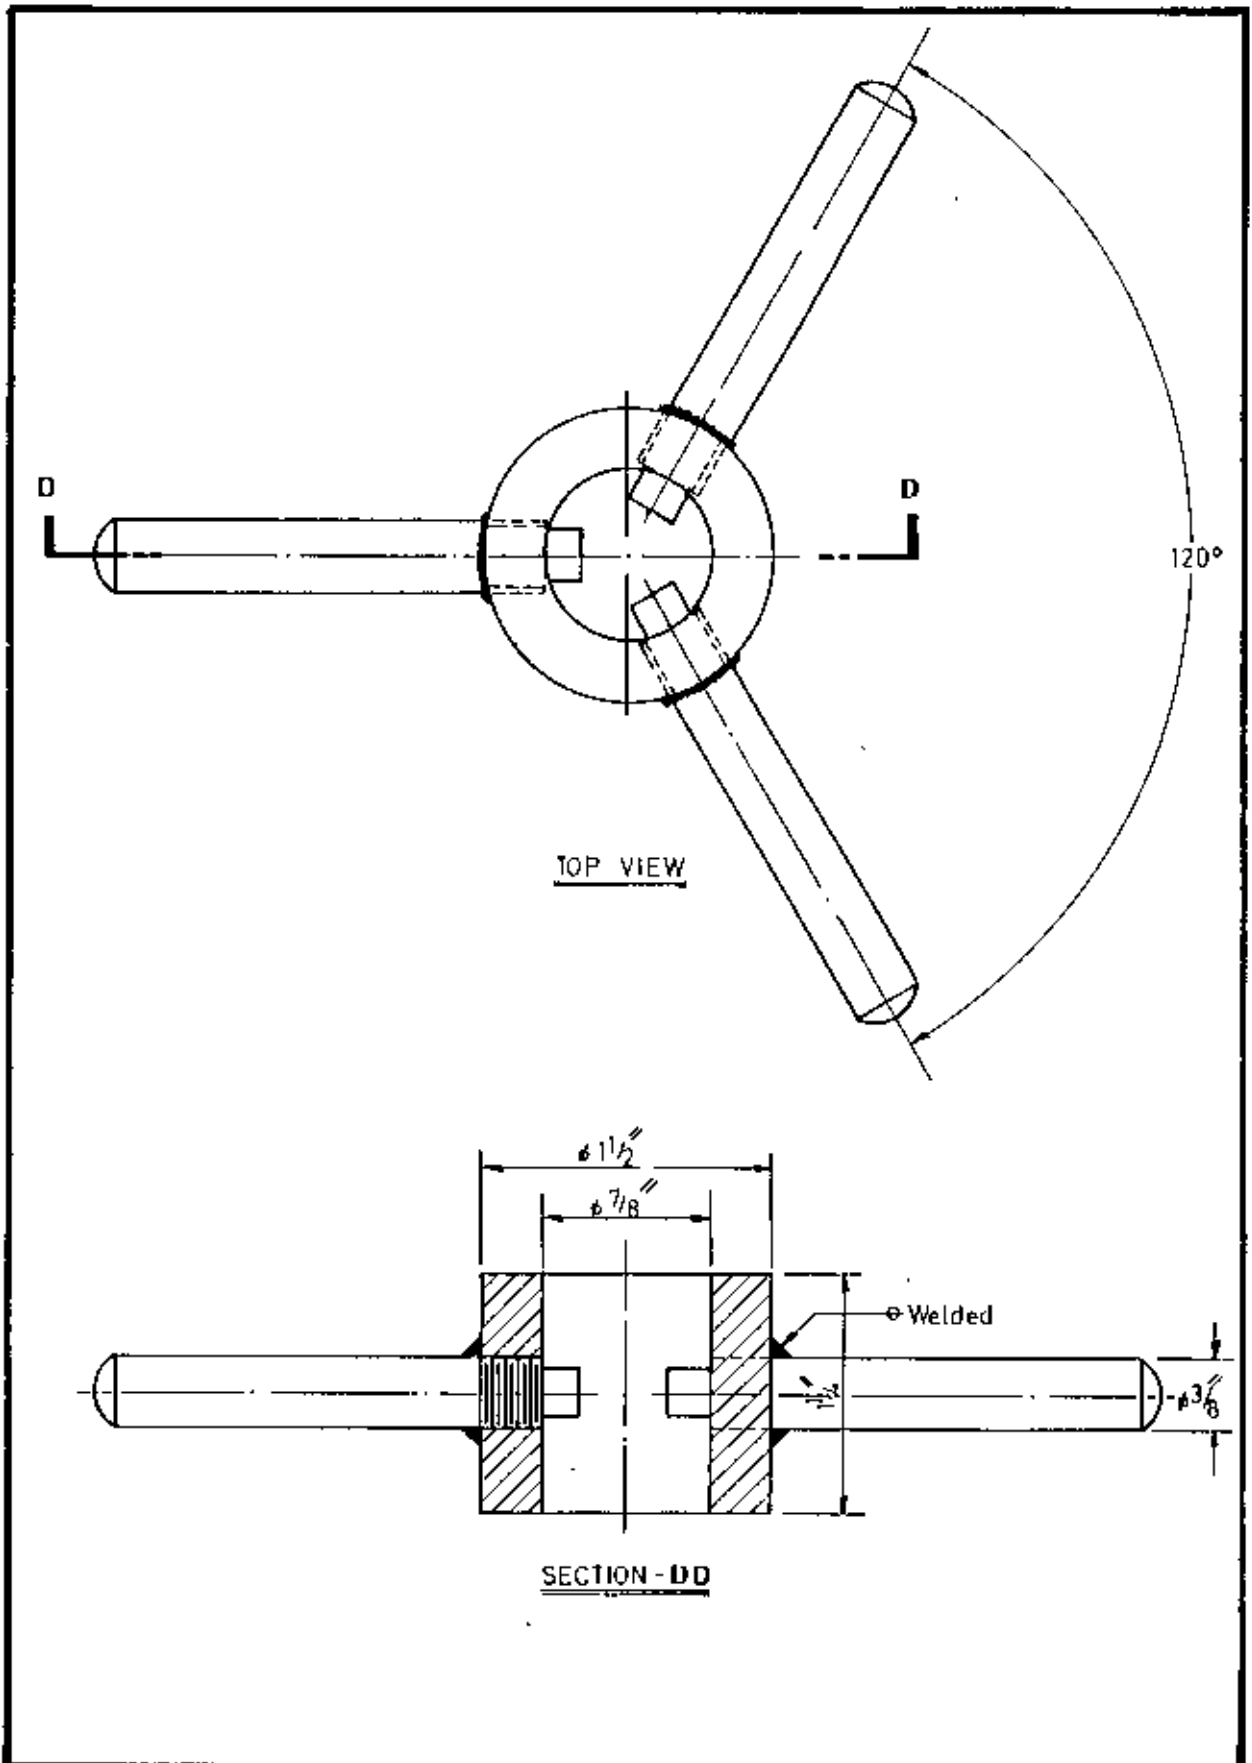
IMPELLERS WITH SPACERS SUB-ASSEMBLY
